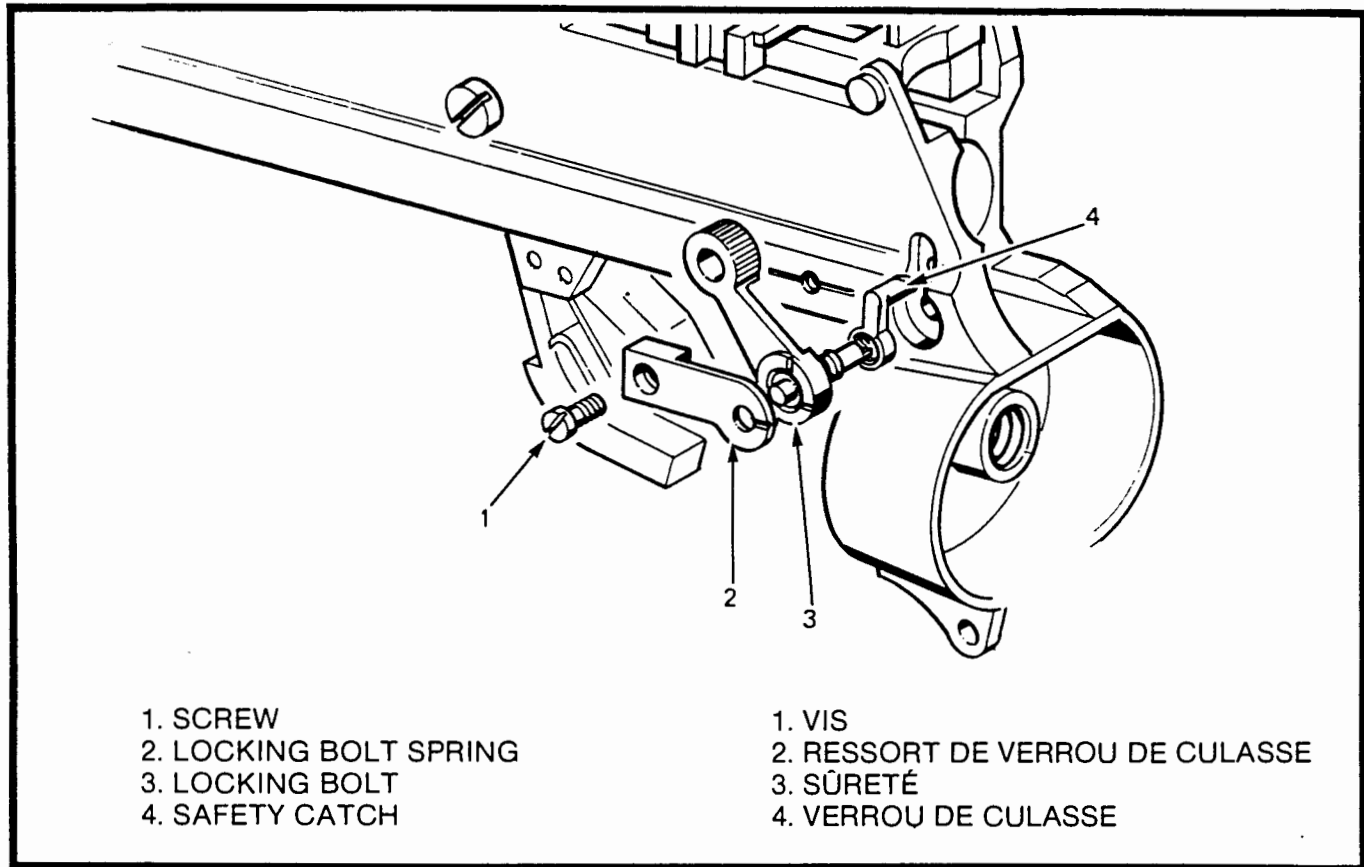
Removing the Bolt Locking Assembly (Safety)
